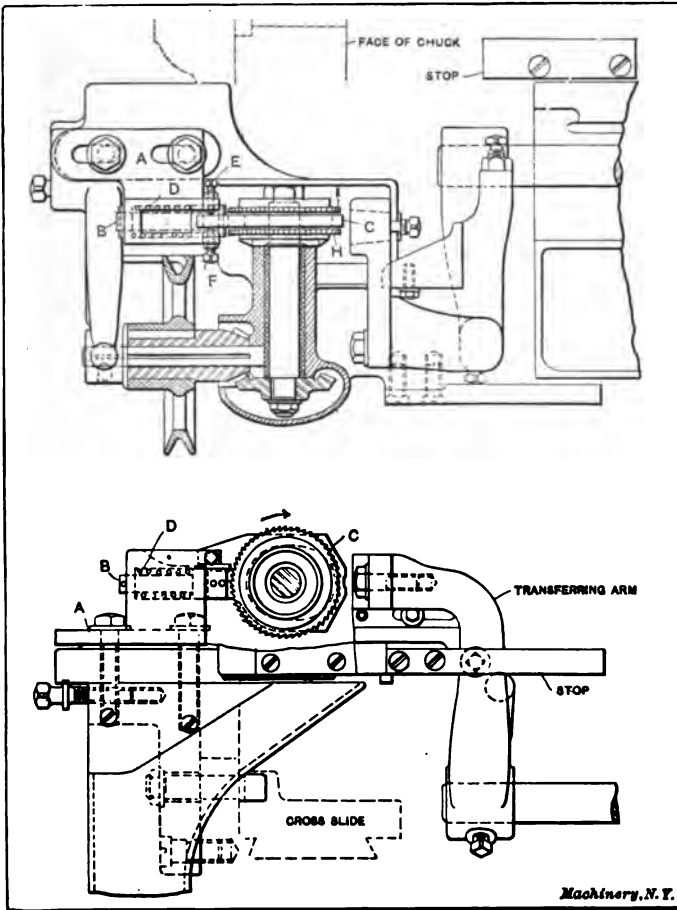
Slabbing Attachment used on Screw-slottting Attachment
